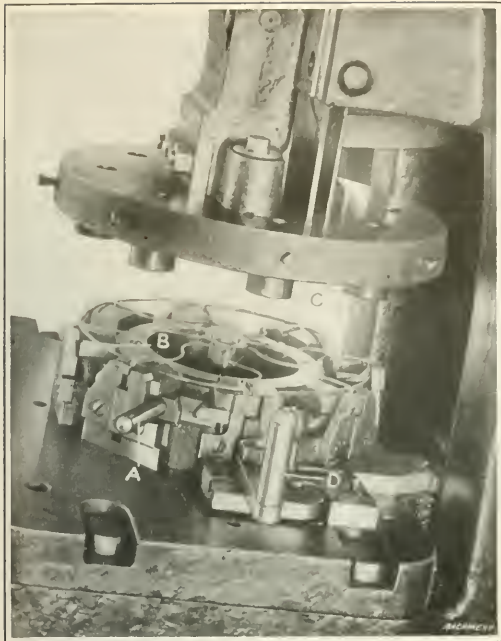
Inclined Press for assembling Front Rim Wire and Arms
